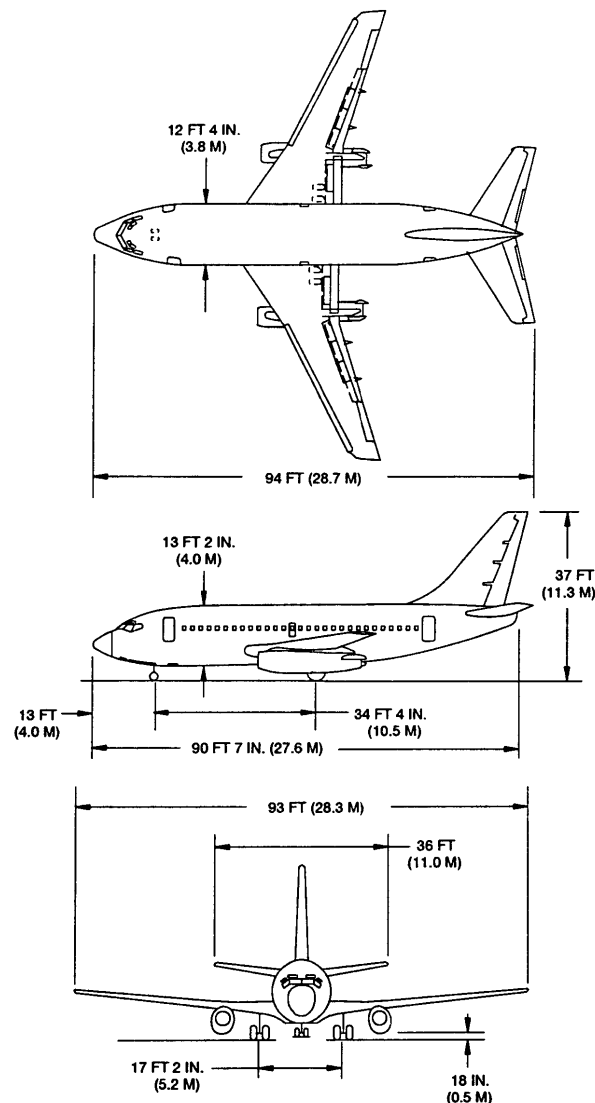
Boeing 737-200 3-view drawing (courtesy of Boeing)
